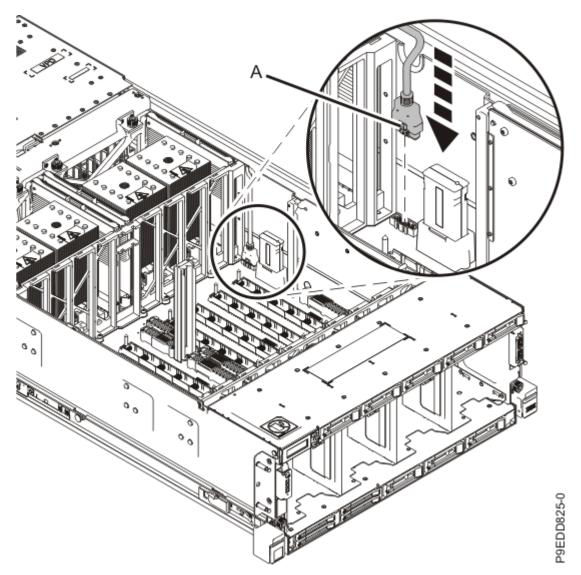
Reconnecting the rear USB cable in the USB socket on the system backplane
